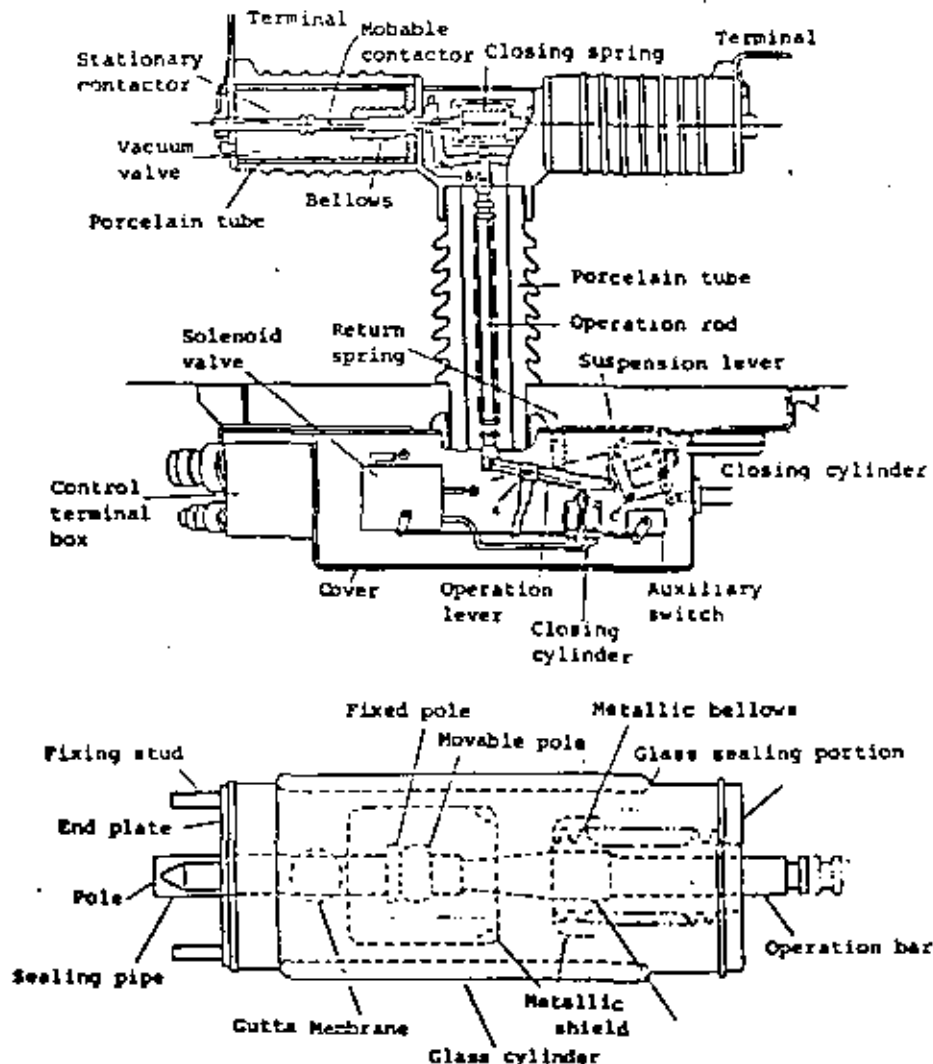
Vacuum Circuit Breaker and Vacuum Valve
